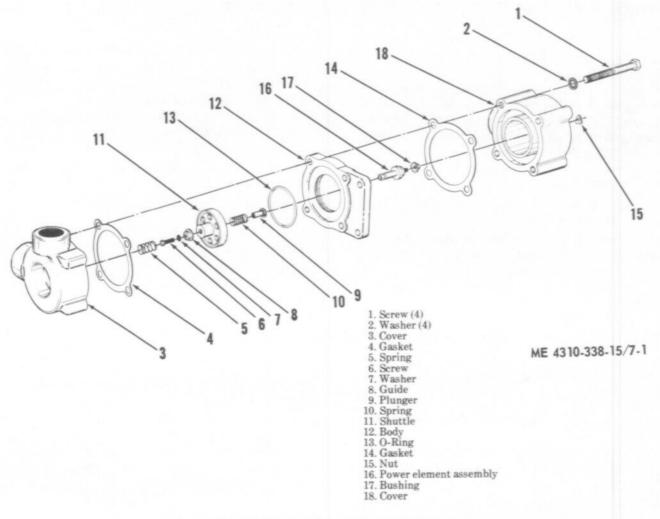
Thermal bypass valve assembly; disassembly and reassembly.
